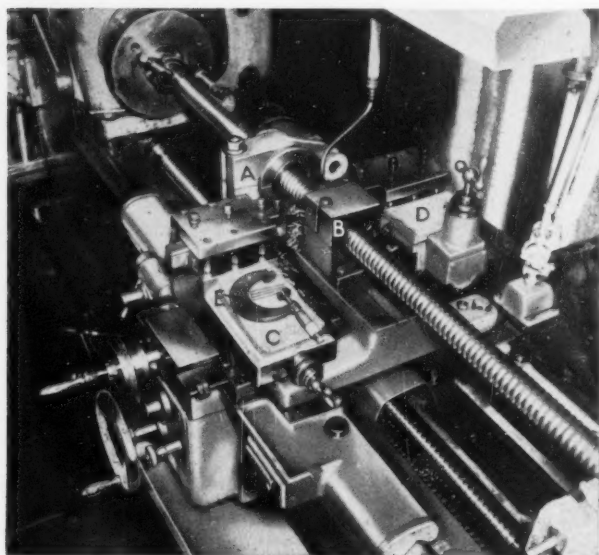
One of the Special VDF Lathes Employed for Finishing Lead Screws
